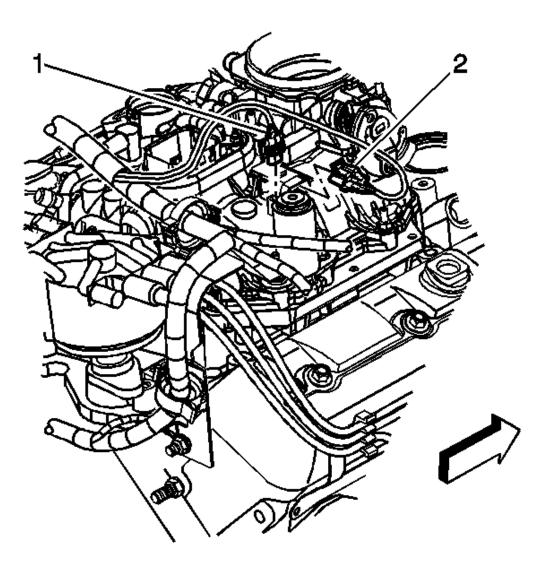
View Of EVAP Canister Purge Solenoid Valve & MAP Sensor Courtesy of GENERAL MOTORS CORP.
